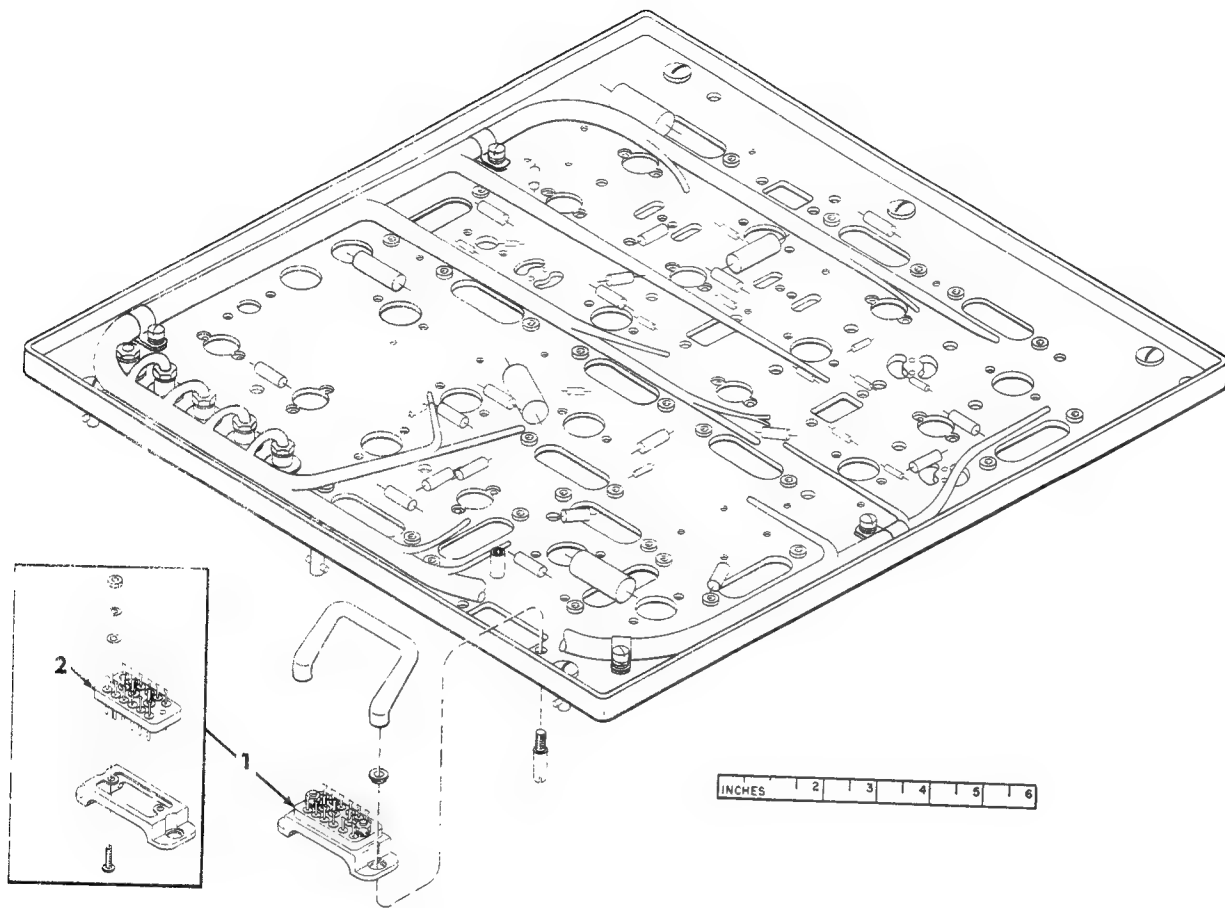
Coder, radar, guided missile (8159349)—partial exploded view
